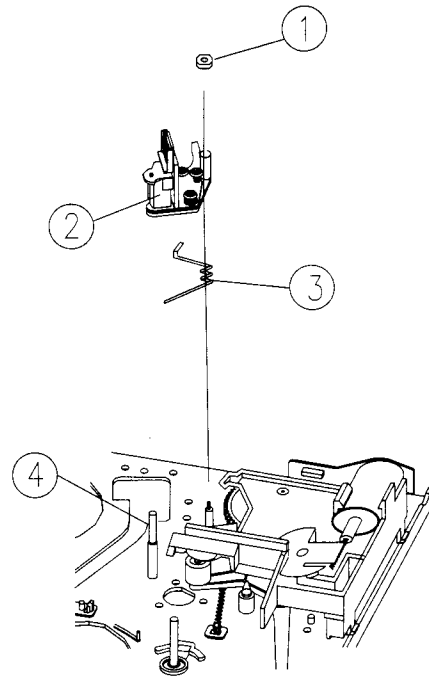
DISASSEMBLY OF THE AC HEAD ASS'Y
